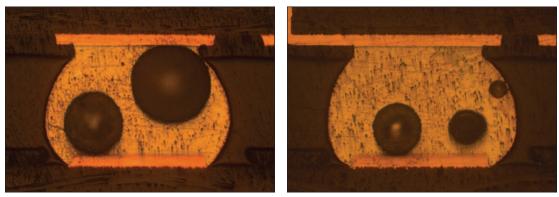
Metallographic images of voids observed within solder balls on a BGA assembly.
